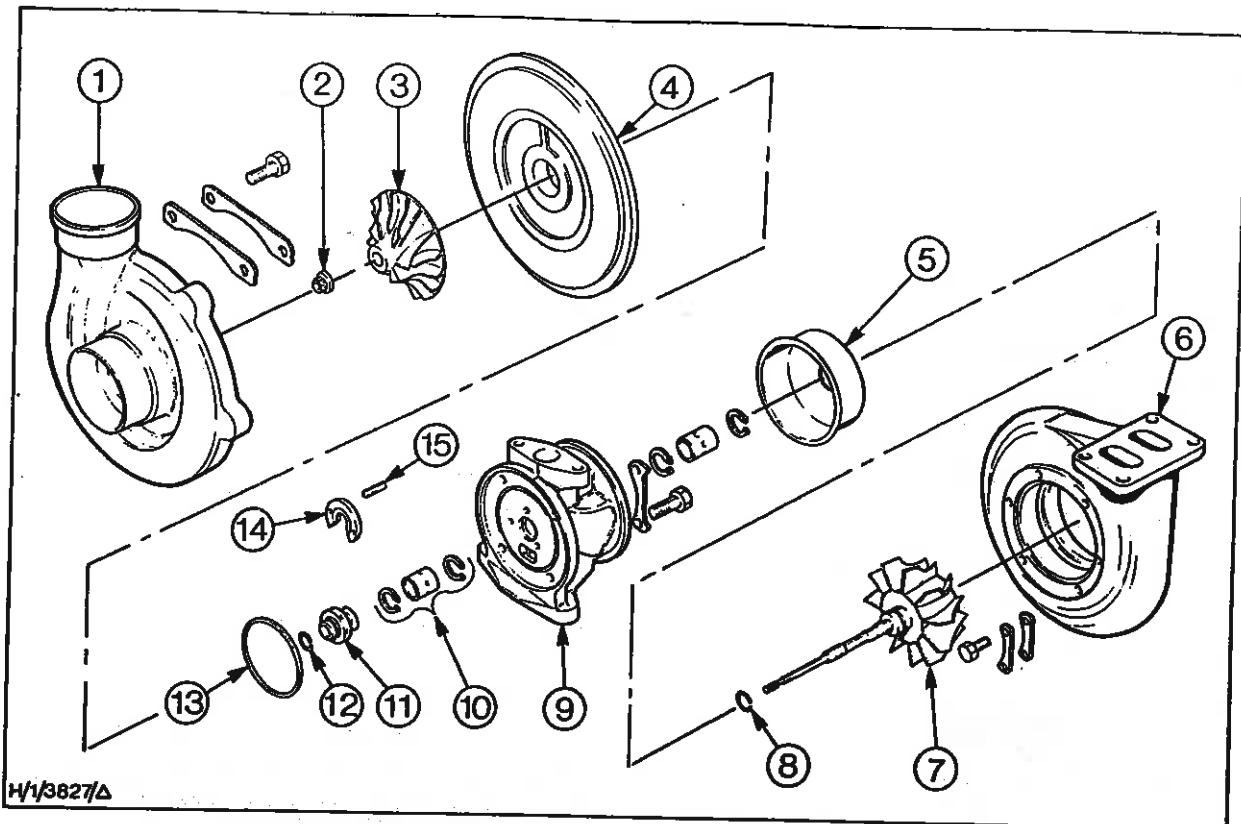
Exploded View of Garrett AiResearch Turbocharger
